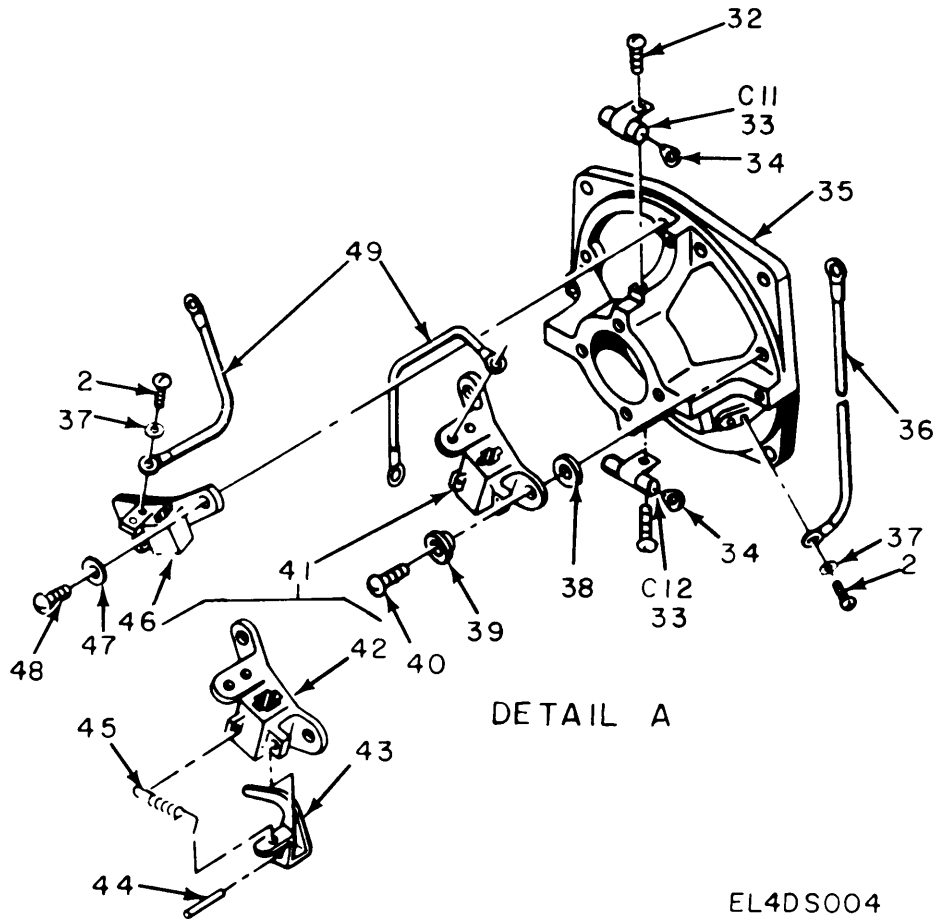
Motor-Generator PU-543C/A, Rotating Section (Sheet 2 of 2).
